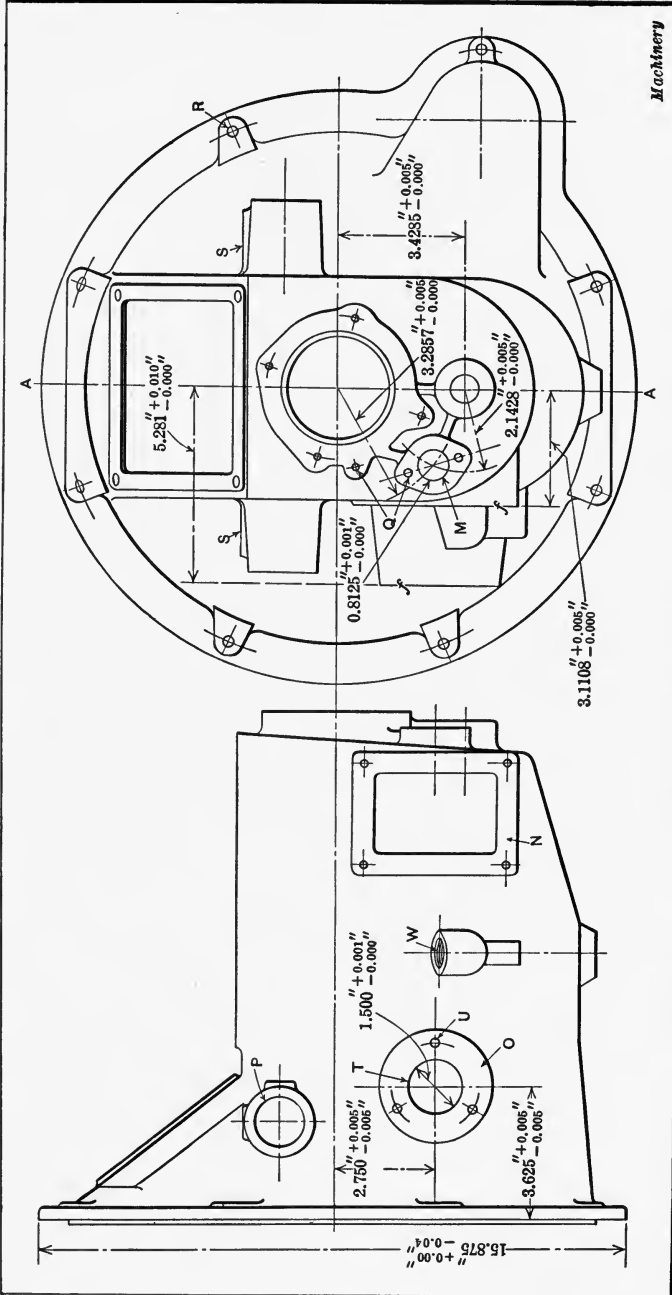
Drawing of Automobile Transmission Case which requires Forty Machining Operations
